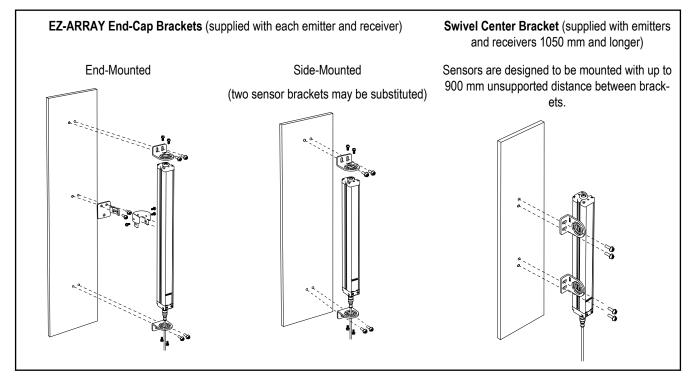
A-GAGE EZ-ARRAY emitter and receiver mounting hardware
